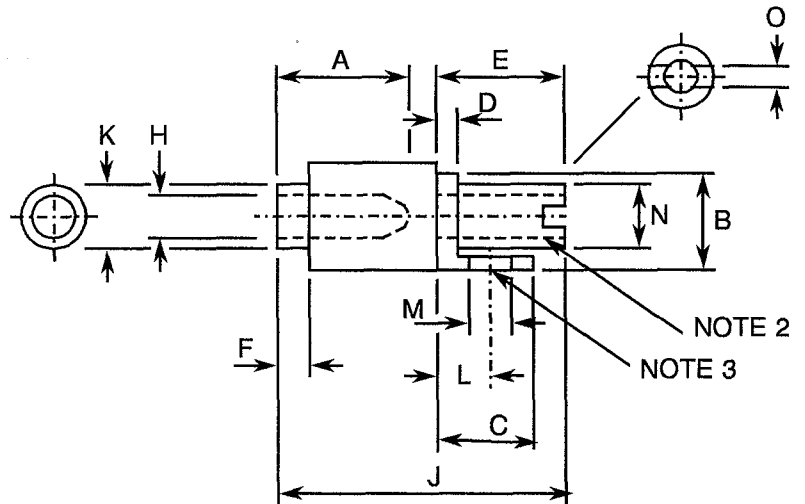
PHYSICAL DIMENSIONS(CONTINUED)
